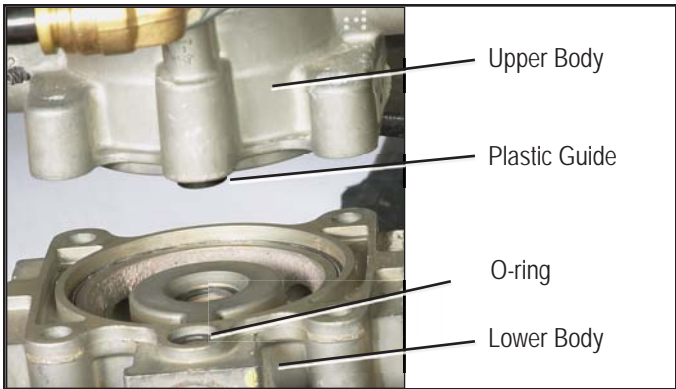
PLASTIC GUIDE AND O-RING SEAL
